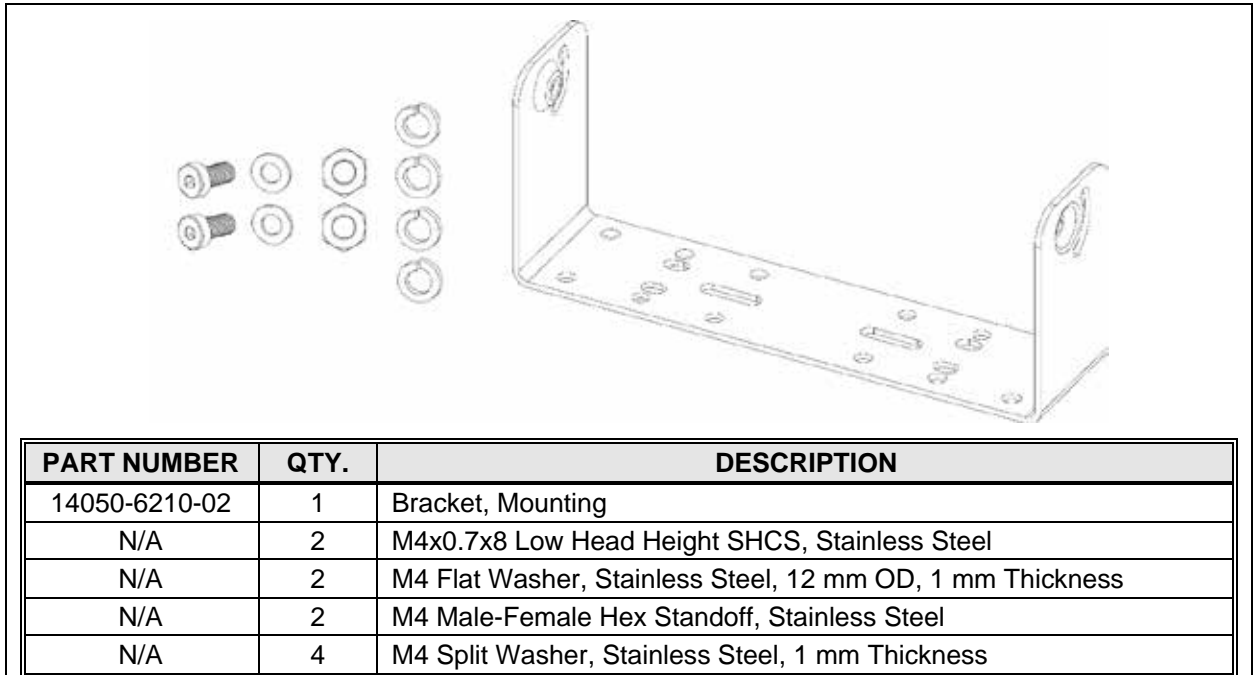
XL-CH Mounting Bracket Kit 14050-6210-01
